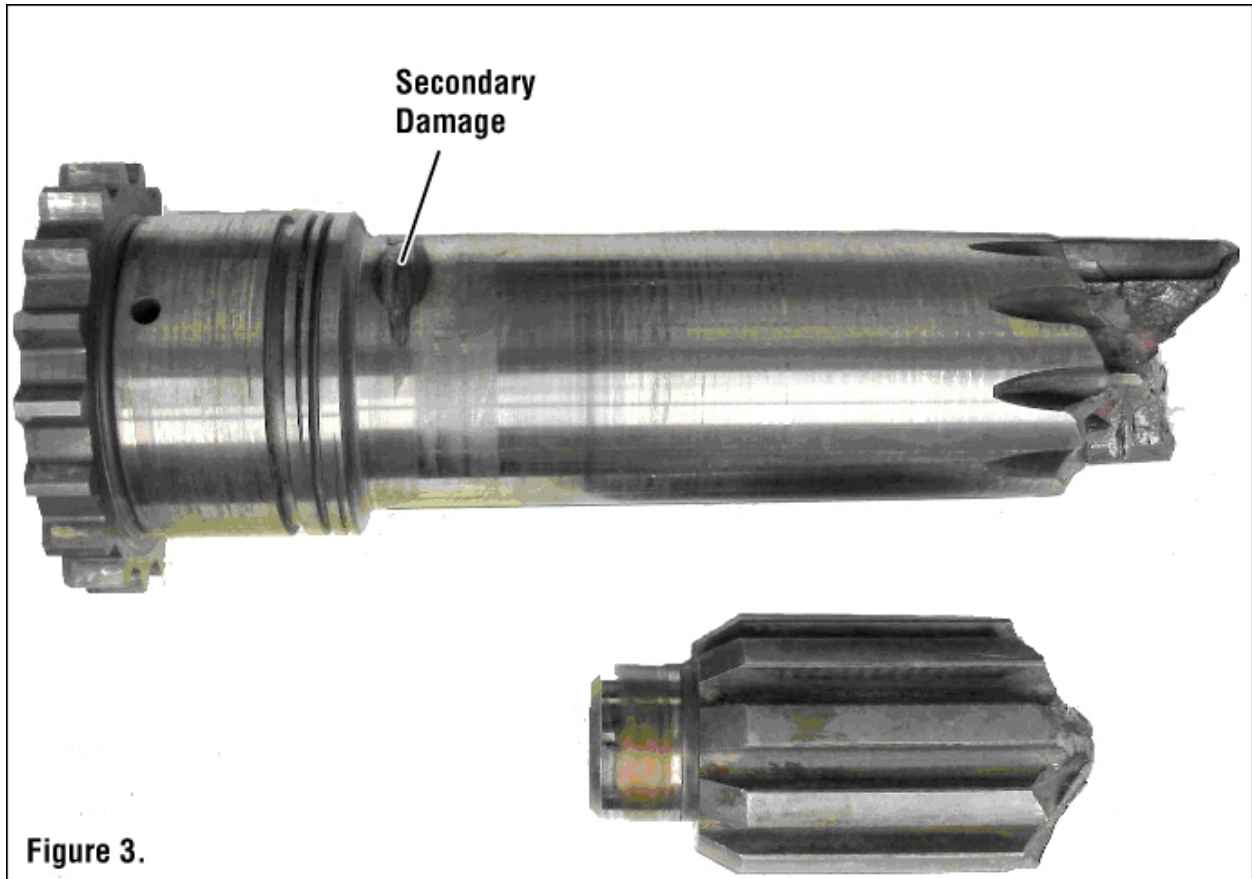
45 Degree Fracture: Typical secondary damage to the shaft diameter just forward of the input bearing. Also, the main drive gear drive spline ends are rounded. This type of fracture (surface initiated torsional fatigue) with the 45 degree helical fracture, often results in secondary damage to either (or both) the engine or transmission. This damage is due to the separating thrust forces—the fracture surfaces act as screw threads forcing the rearward section of the shaft into the transmission case and the forward section of the now failed shaft into the engine flywheel area.
